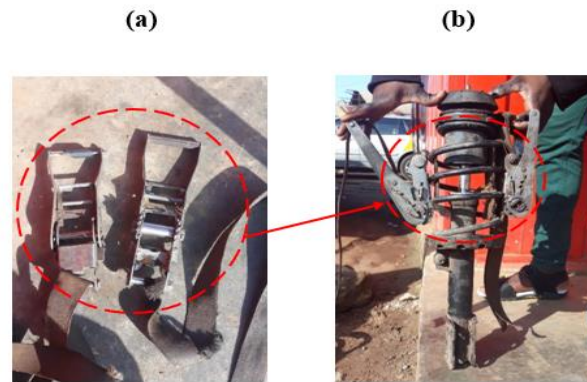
(a) Belt coil spring compressor. (b) Fitted with a coil spring
